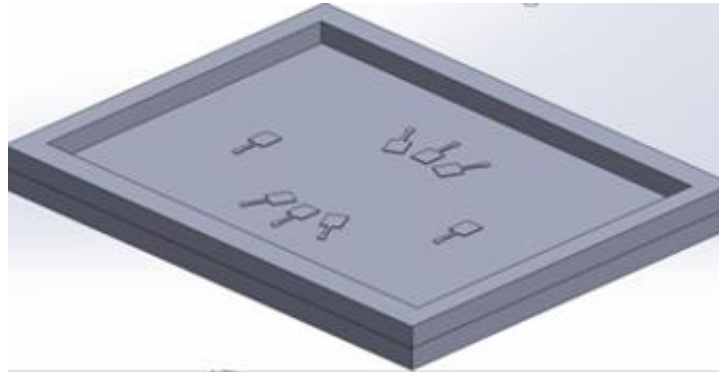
Closed Loop Valve Layer Master Mold Design
